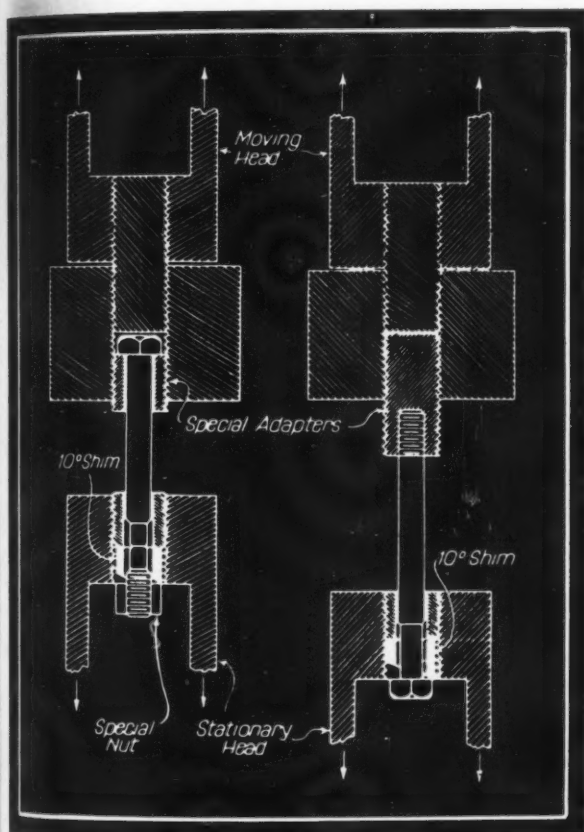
These fixtures were used for testing bolts under combined tension and bending
